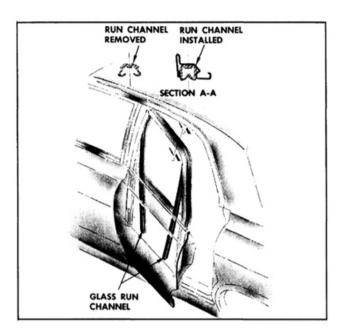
69 Style - Rear Door Glass Run Channel Assembly
